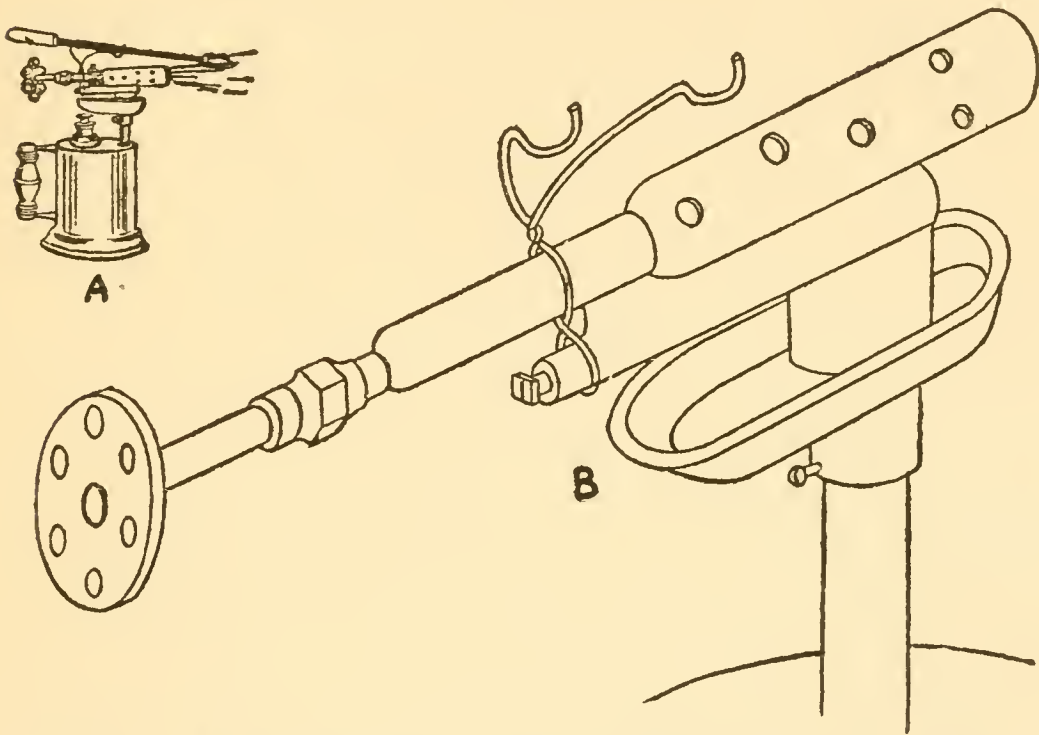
A wire holder for your soldering iron. A. How it is used. B. How it is made.
